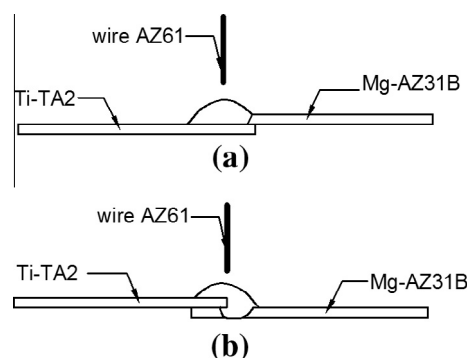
Schematic of CMT welding of Mg AZ31–titanium TA2 sheet: (a) Mg–Ti joint (top Mg sheet–bottom Ti sheet), and (b) Ti–Mg joint (top Ti sheet–bottom Mg sheet) (dimensions in mm).
